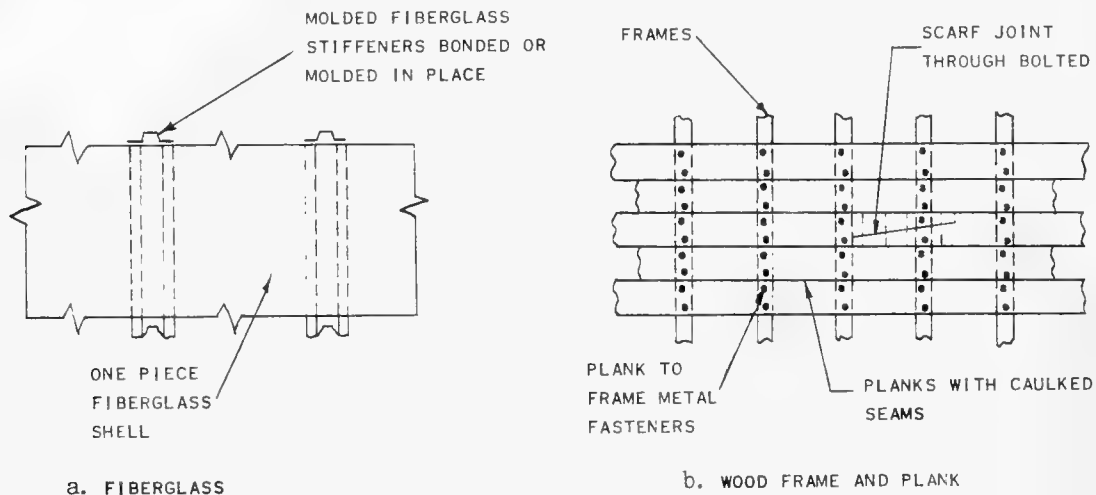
Fiberglass and wood frame and plank hull construction
